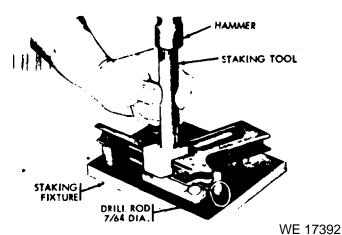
Installing and staking of plunger tube on receiver, utilizing improvised tool for staking plunger tube.
